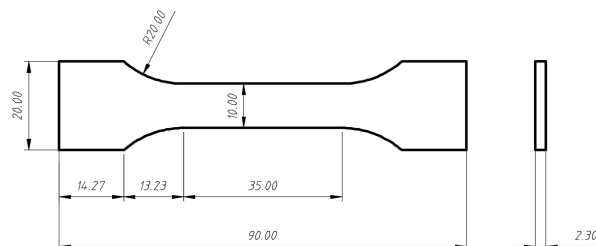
Geometry and dimensions (unit: mm) of tensile specimen.
